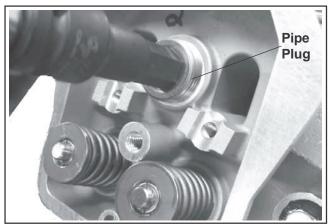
Installing Pipe Plug in Cylinder Heads.
